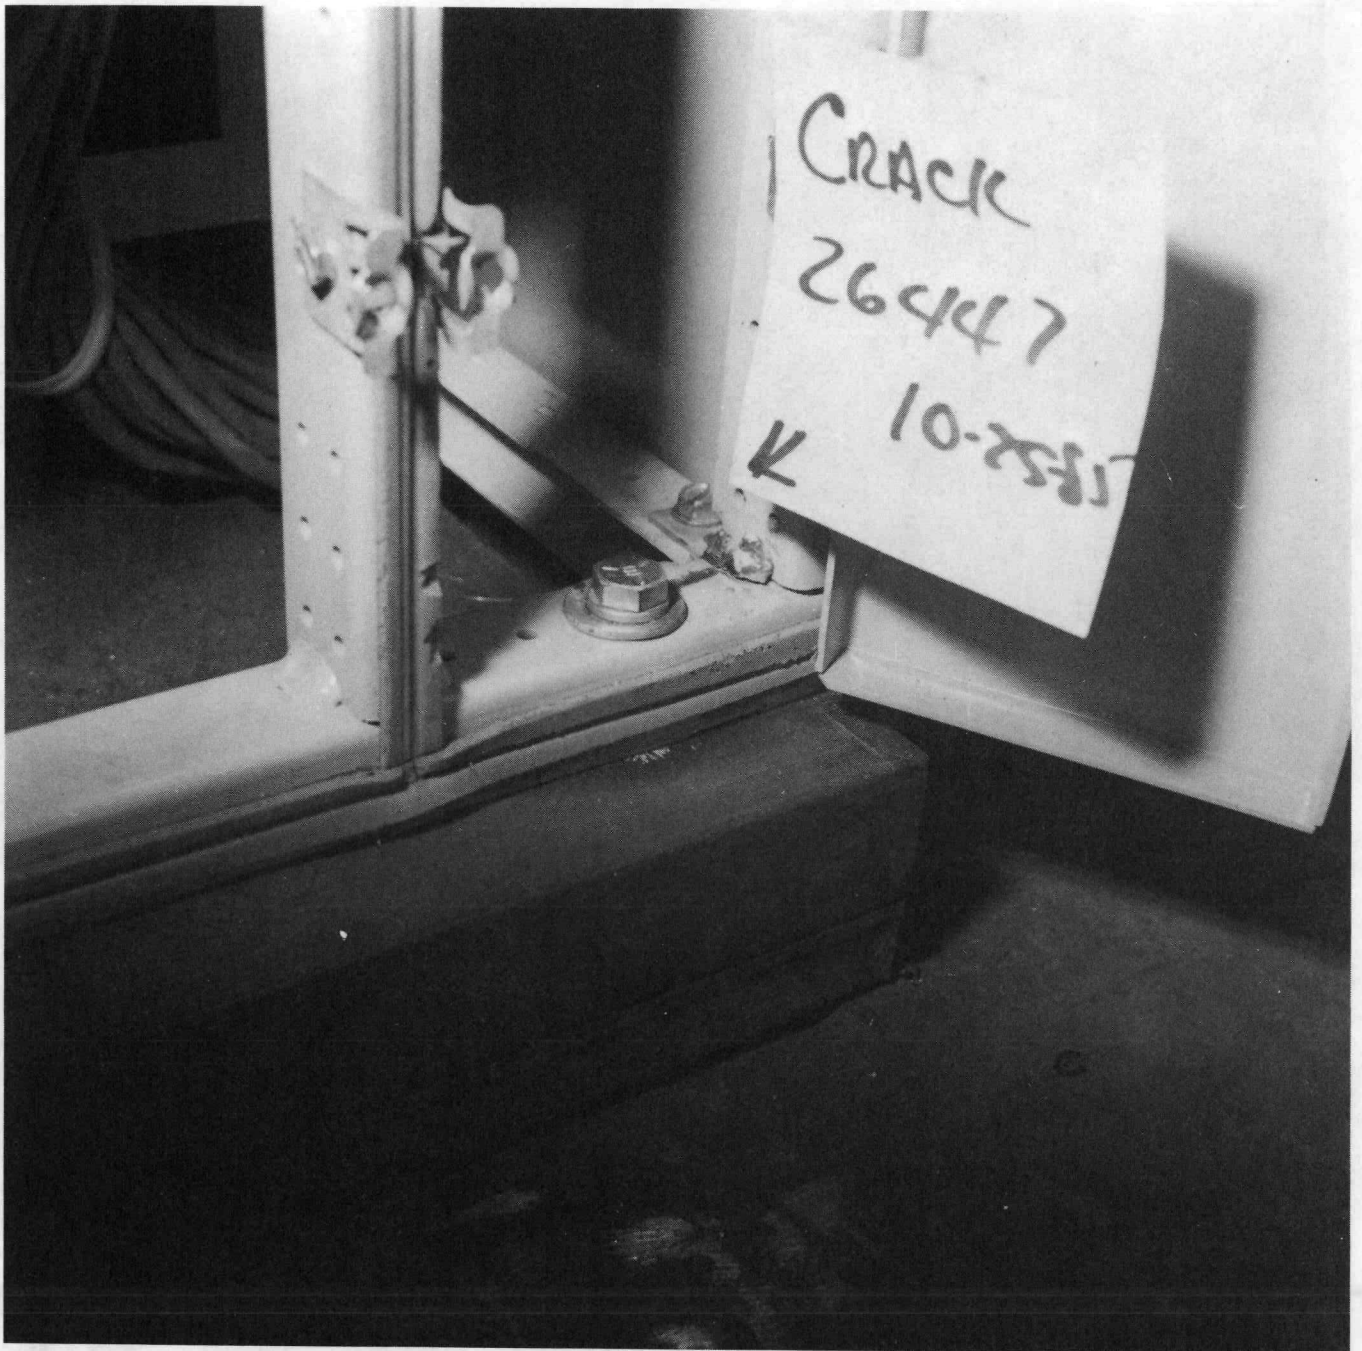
Details of cracked welds following Run 29 (1.6g table ZPA)
